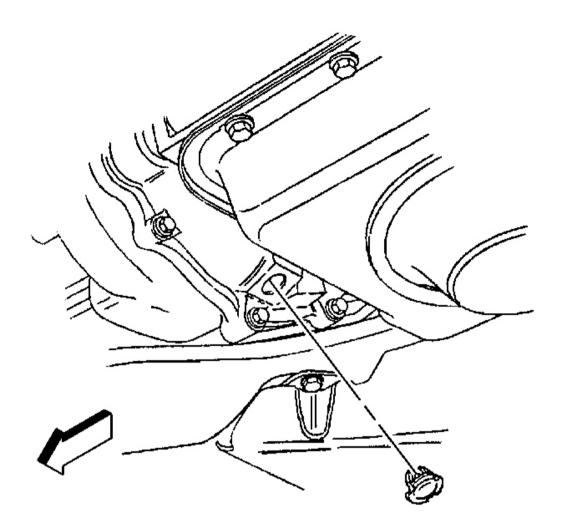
Transmission Torque Converter Access Plug Courtesy of GENERAL MOTORS CORP.
